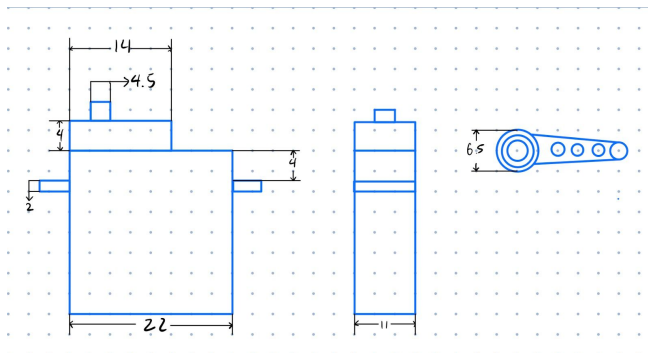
Dimensions of a typical micro servo and paper templates to cut parts from cardboard.
